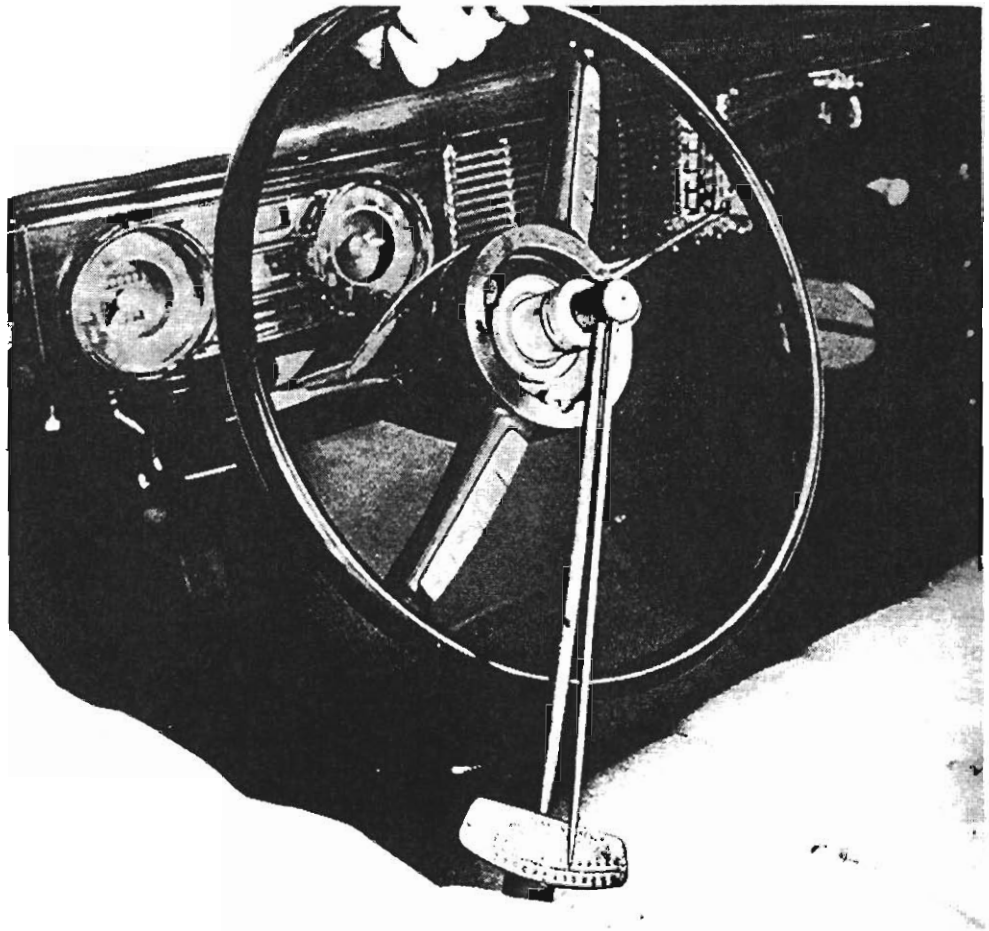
A Torque Wrench Should Be Used When Tightening the Steering Wheel Retaining Nut.
